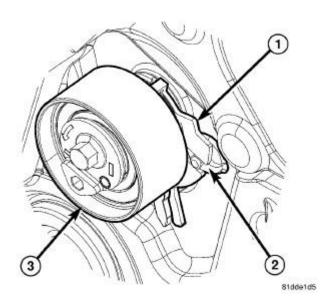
Timing Belt Tensioner & Tensioner Alignment Plate Courtesy of CHRYSLER LLC
